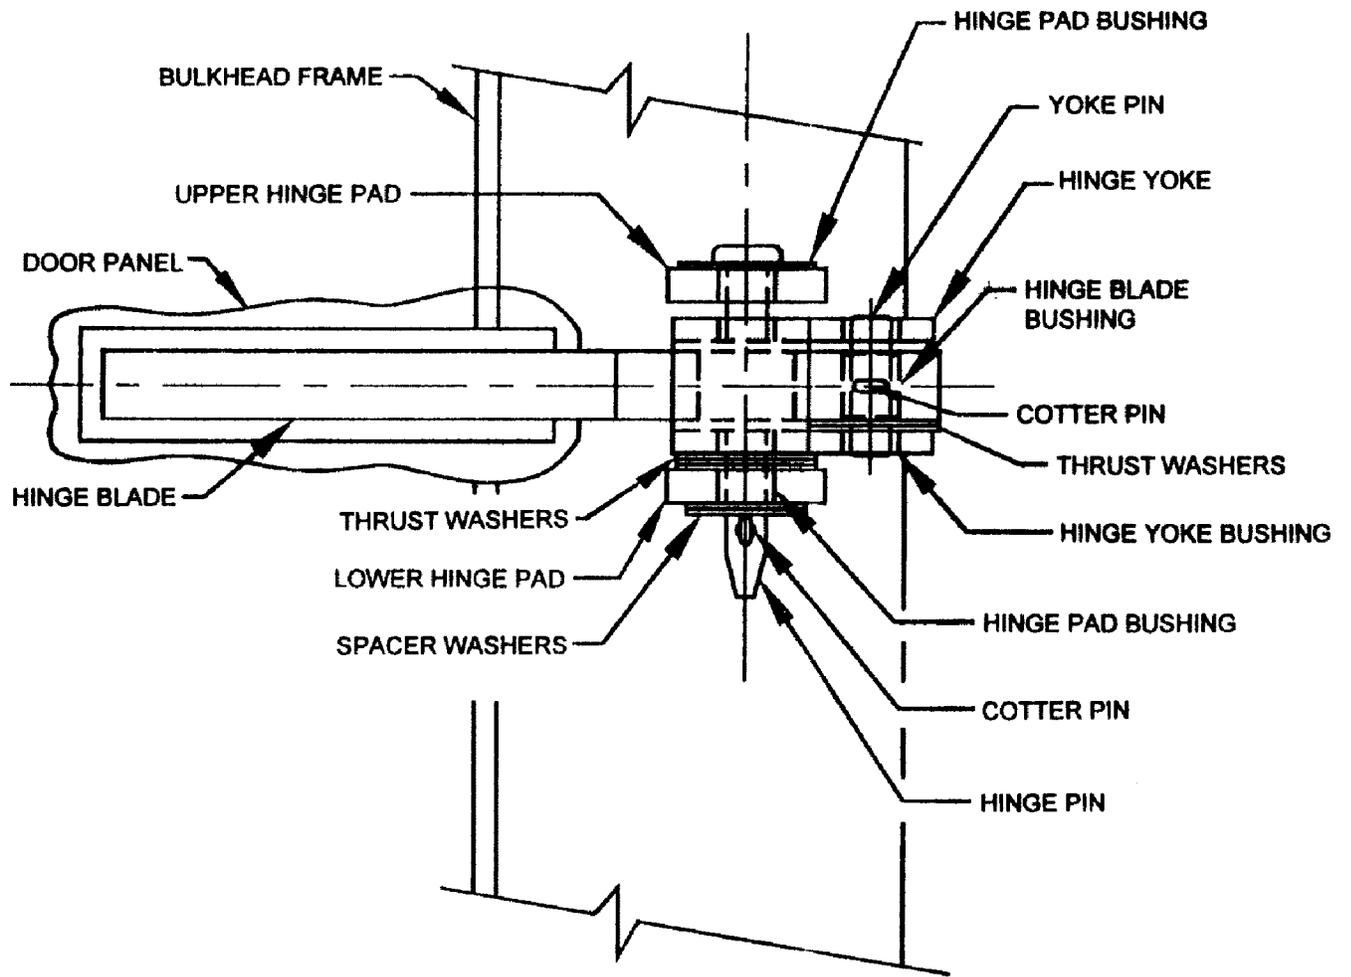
Quick-Acting Watertight Door Hinge Assembly Modified by MACHALT 167-31006 (ECP-518)
